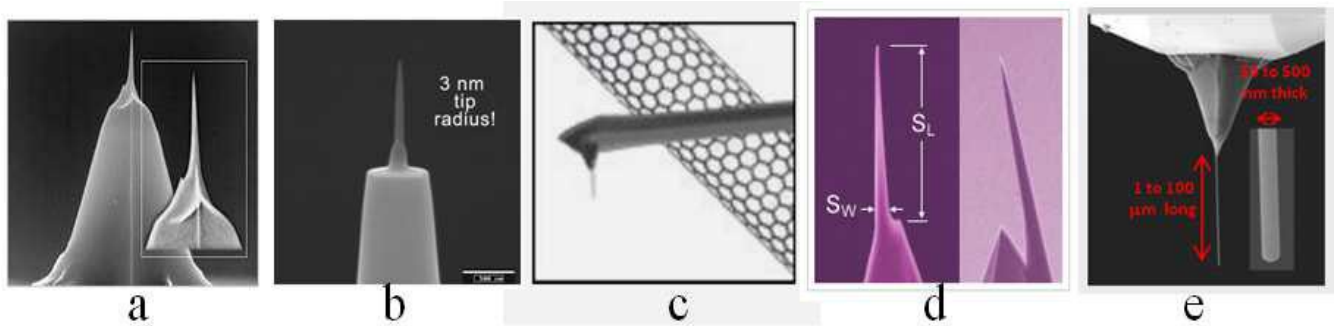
Commercial HAR tip examples where the tips are fabricated with (a) focused ion beam milling, (b) electron beam induced deposition, (c) carbon nanotube attachment, (d) spike attachment, and (e) "Nauga-needle formation" technique
